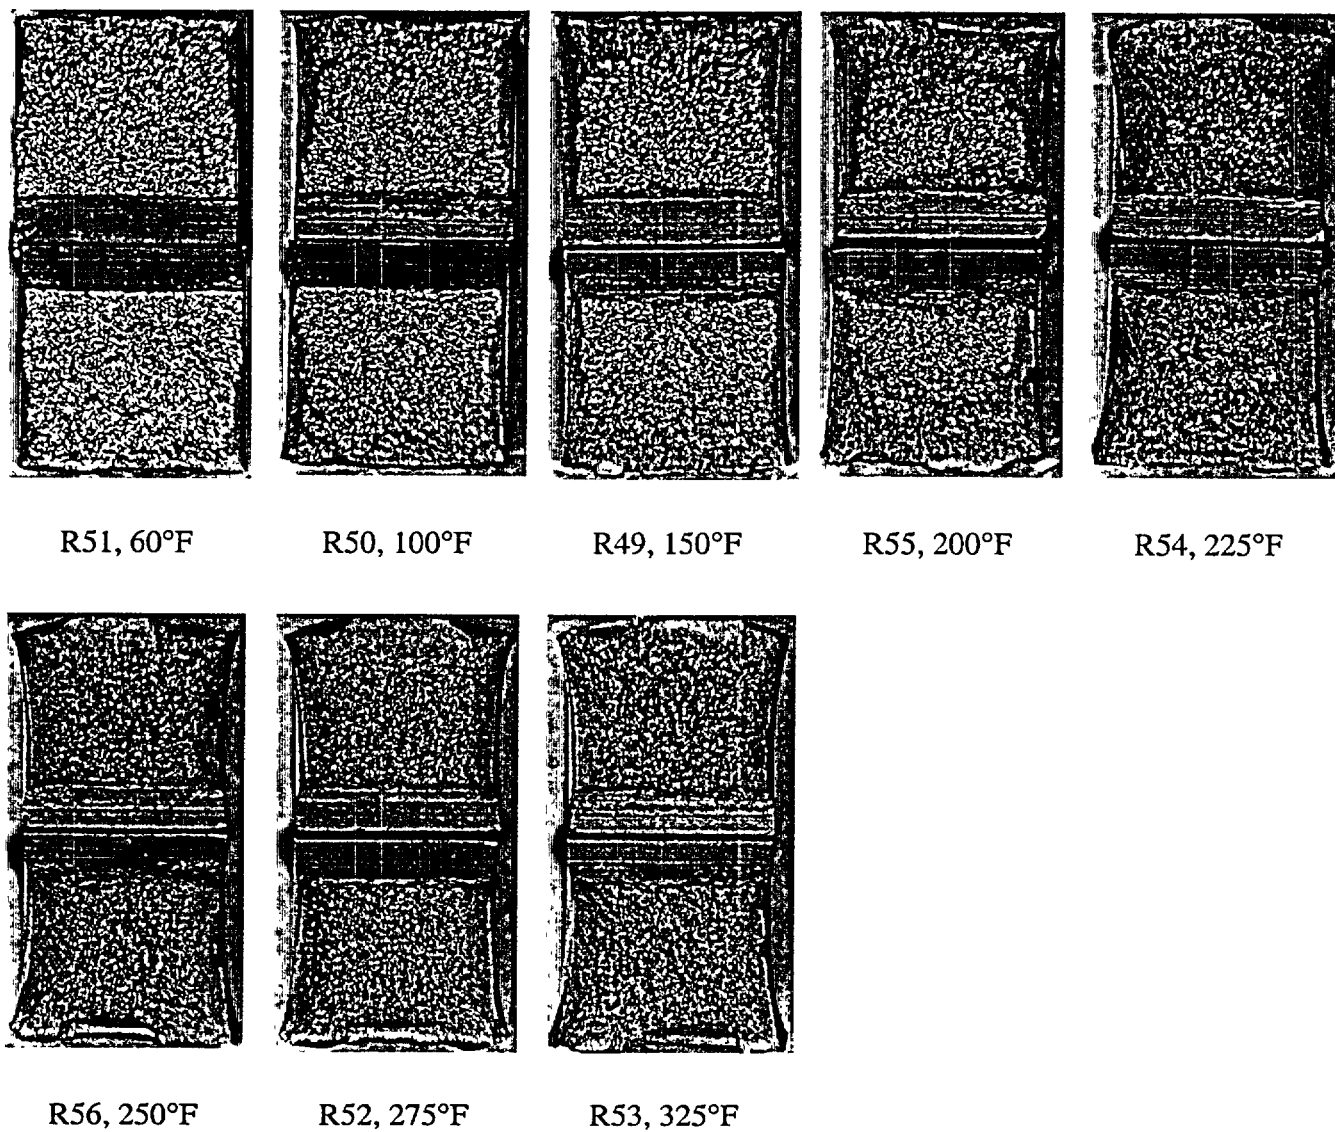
Charpy Impact Specimen Fracture Surfaces for ASTM Correlation Material
